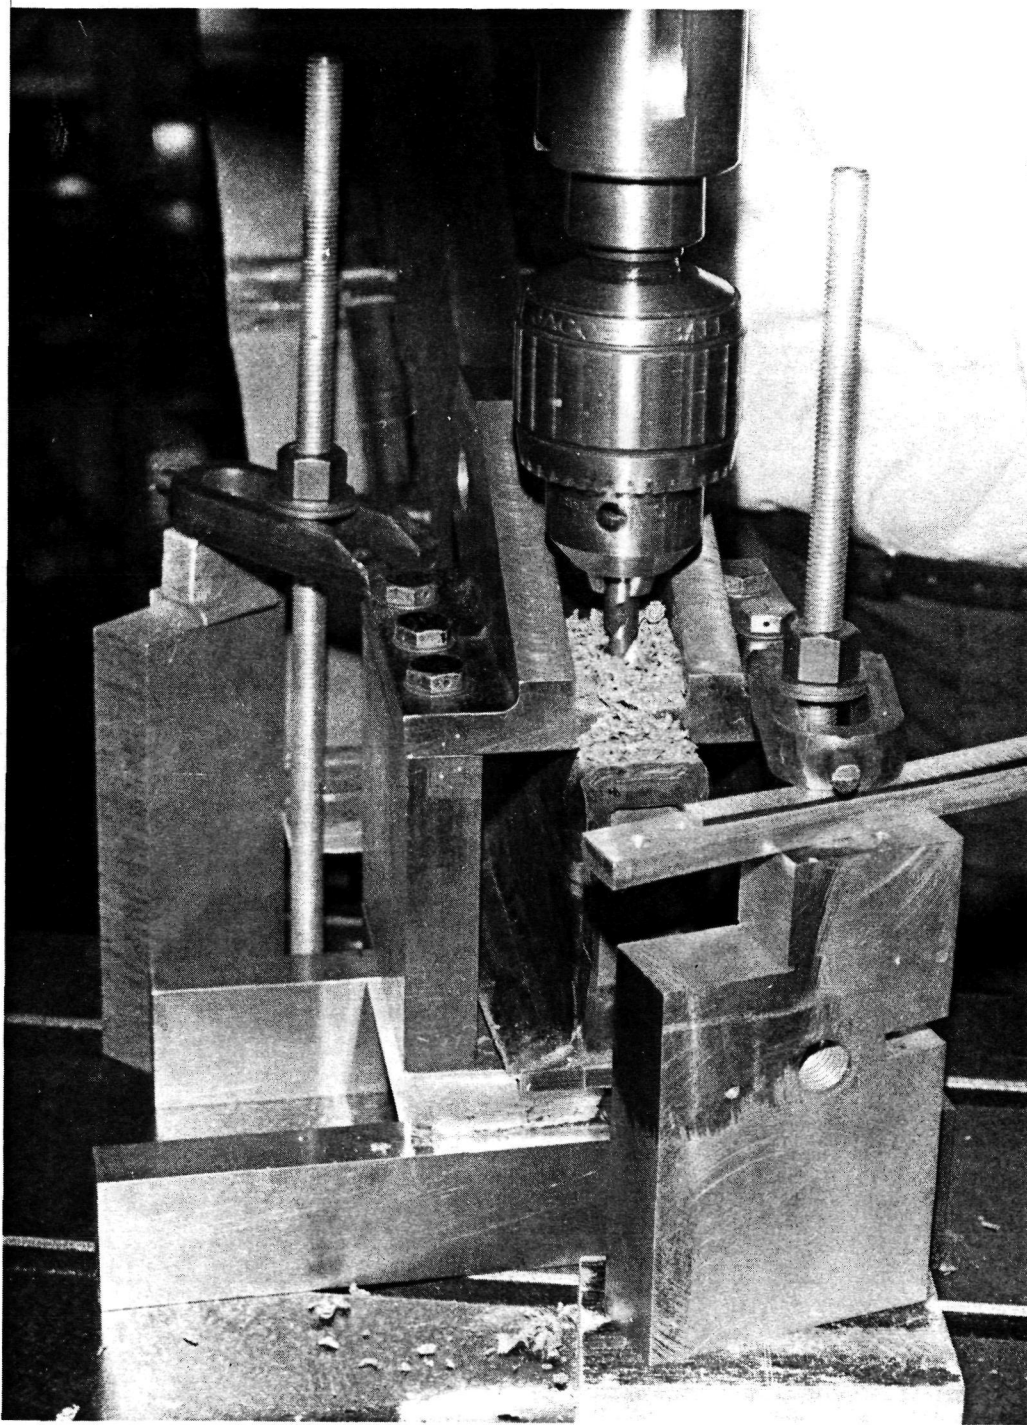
EWR 32381 FRAME FATIGUE SPECIMEN DRILLING OPERATION FOR EWR 44092 TEST END FITTING ATTACHMENT.
